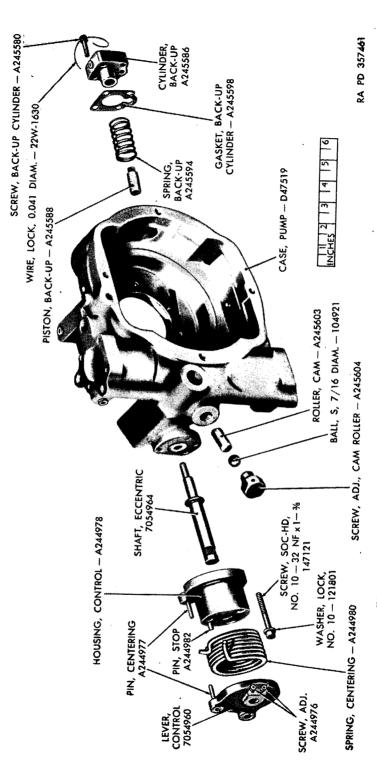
Hydraulic pump eccentric control and back-up piston, exploded view.
